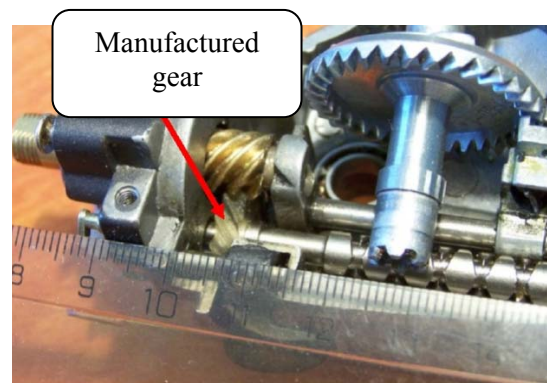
New gear assembled in fishing reel (Manolescu et al., 2011)
